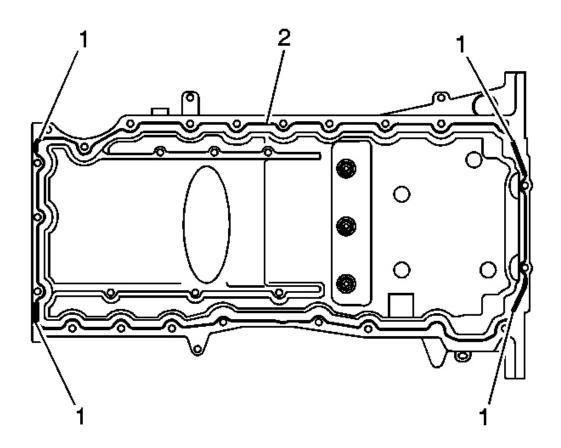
View Of Oil Pan Sealant Application Courtesy of GENERAL MOTORS CORP.
